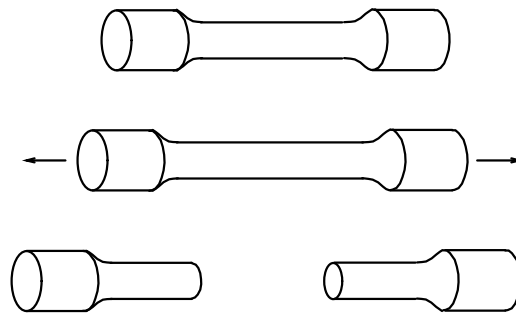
Tensile test with axial elongation and fracture.
